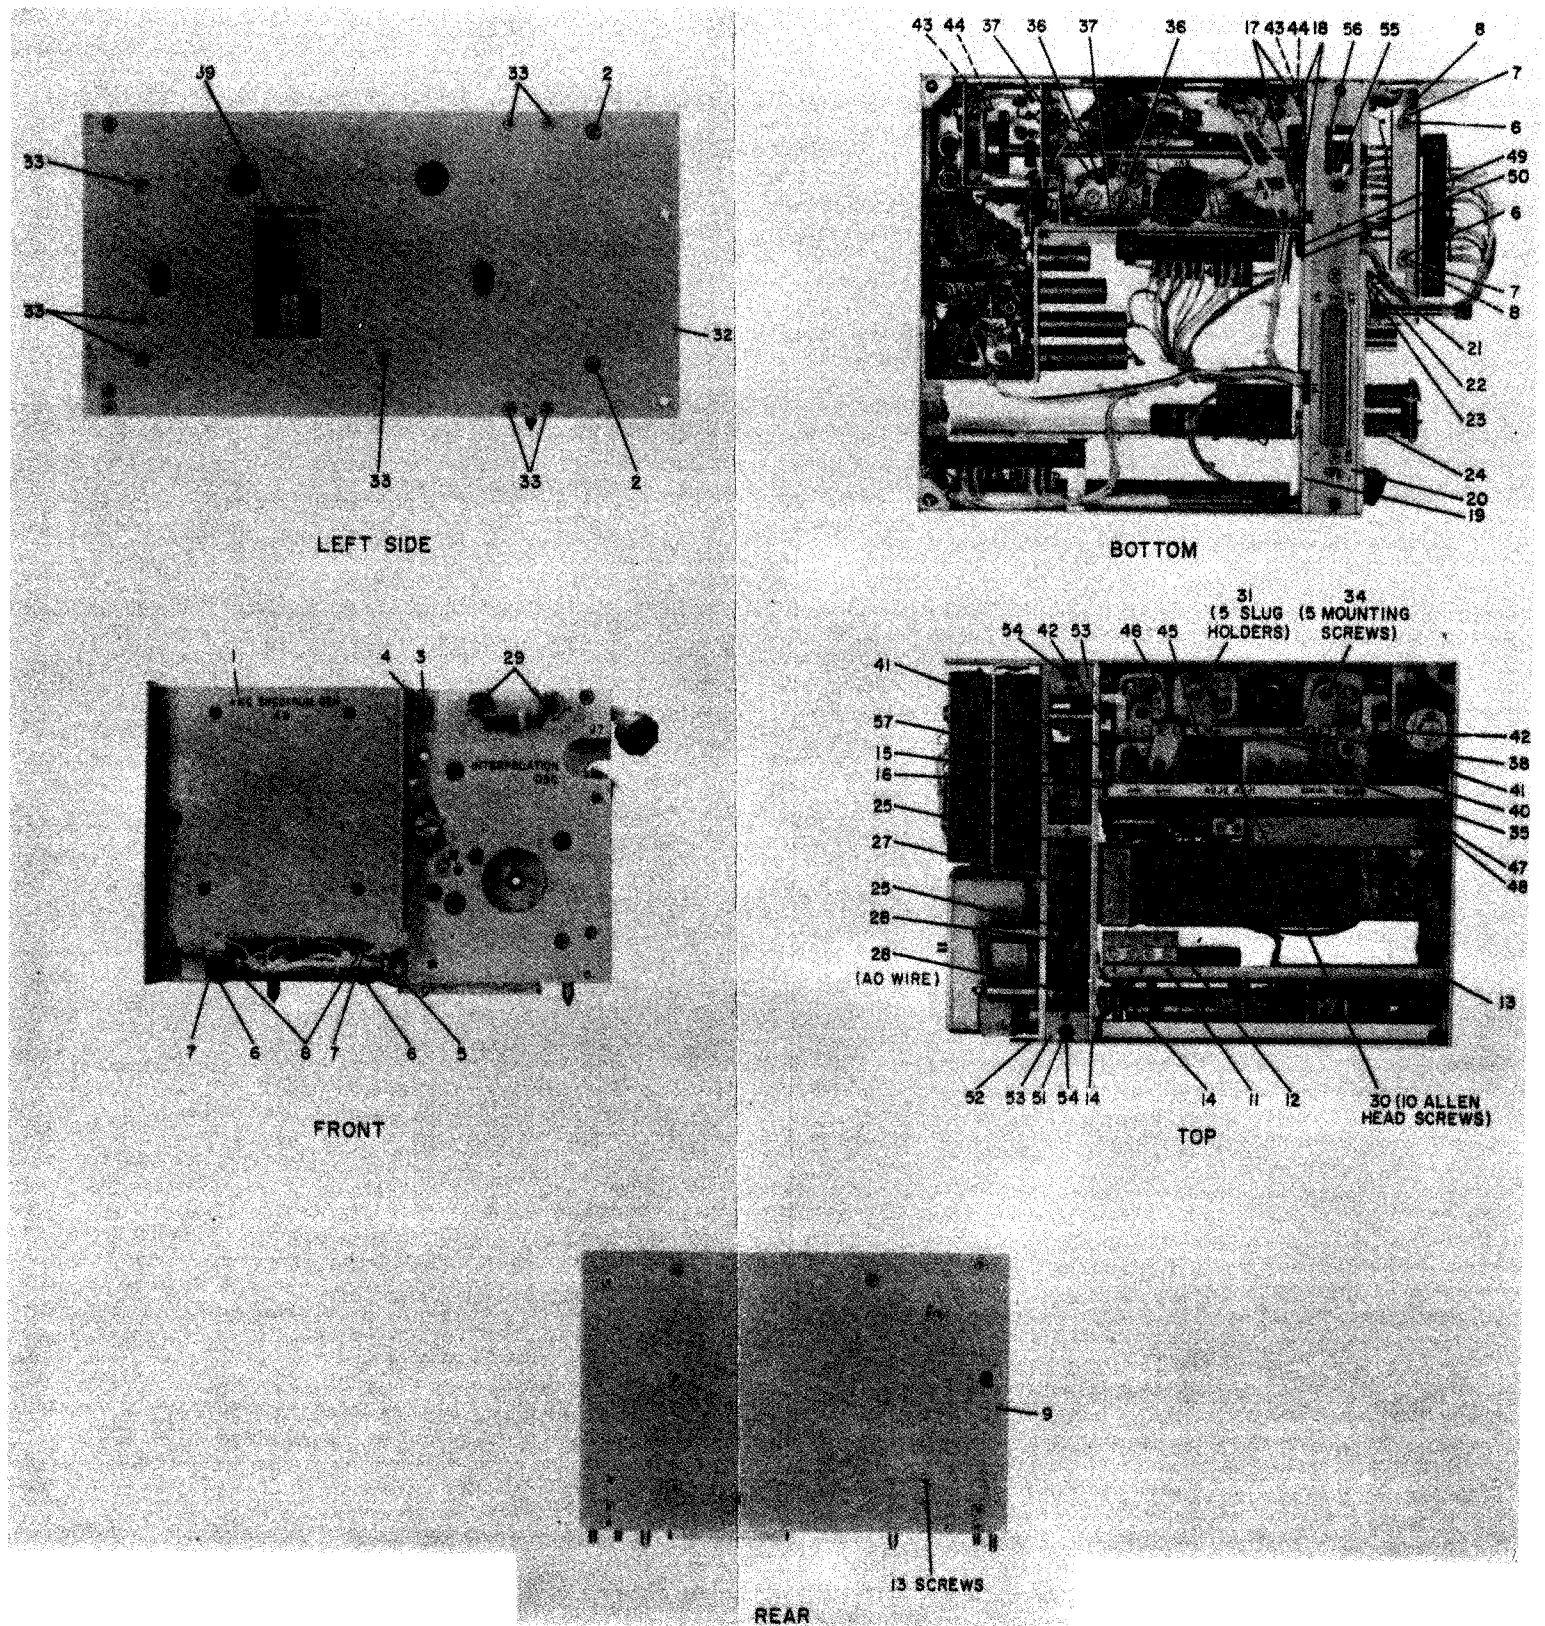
Stabilized Master Oscillator, Front, Left Side, Top, and Bottom Views
